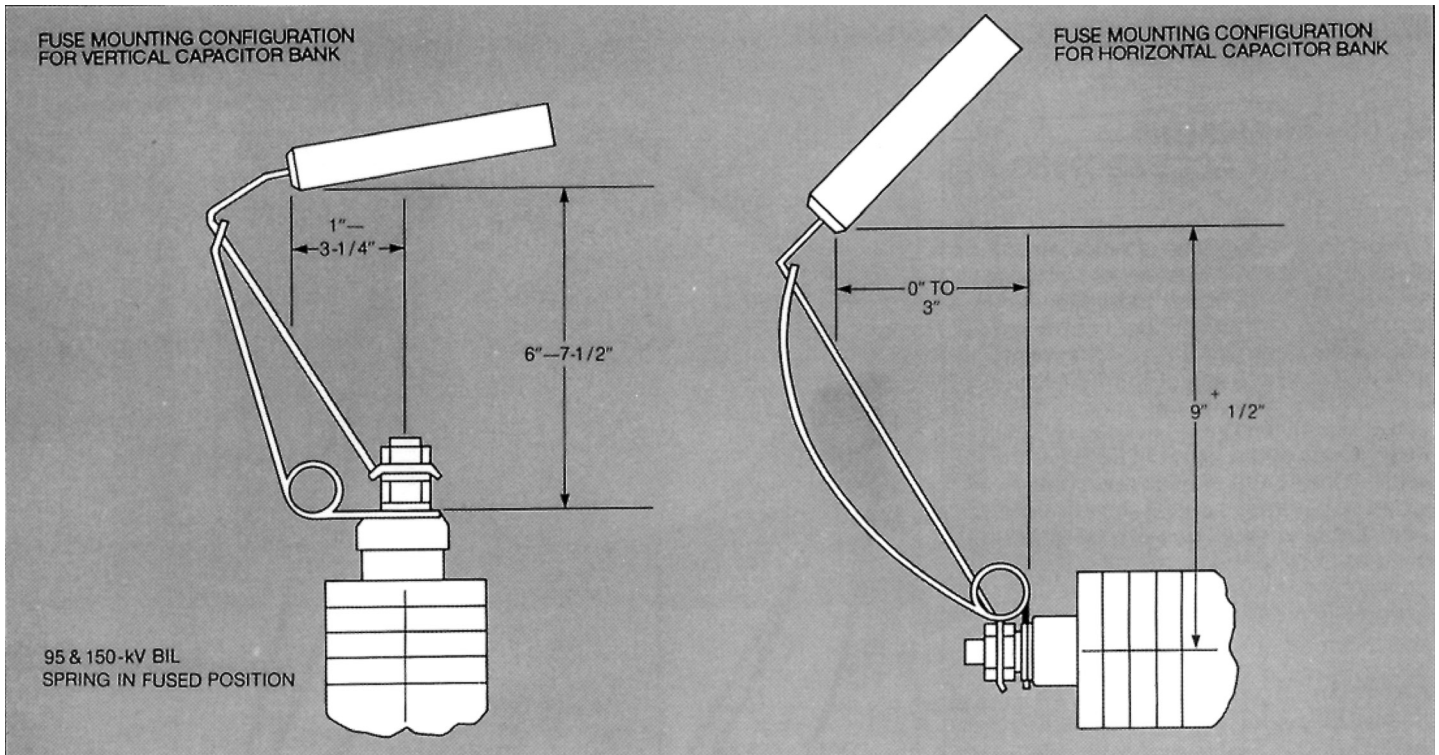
Opti-G flipper spring mounting configurations and dimensions for vertical and horizontal capacitor banks. For mounting dimensions other than those shown, contact your Eaton Representative.
